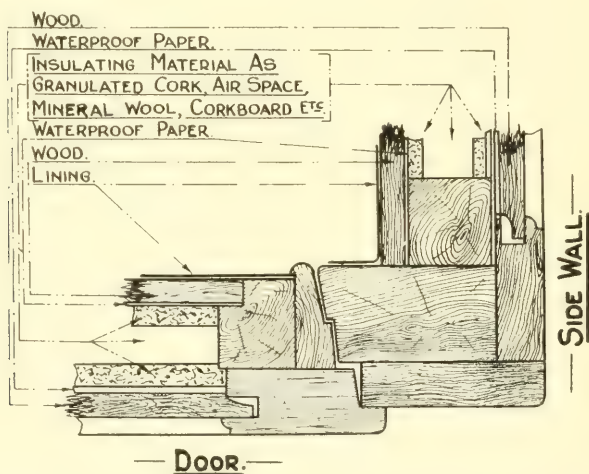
TYPICAL REFRIGERATOR WALL AND DOOR CONSTRUCTION.
